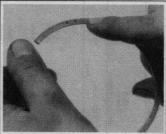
Most rings are marked to show which side of the ring should face up when installed to the piston
